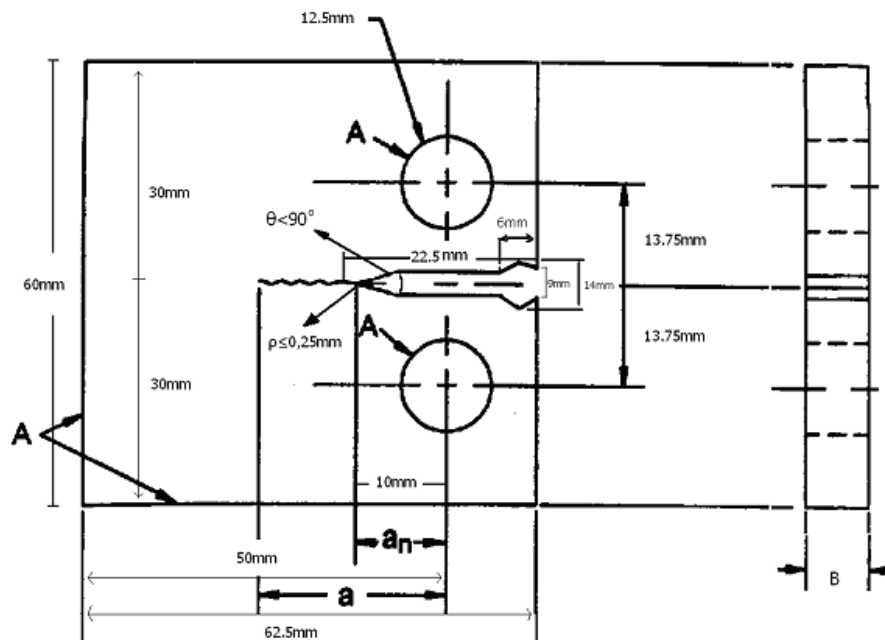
Fracture Toughness CT specimen geometry according to ASTM E399 standard.
